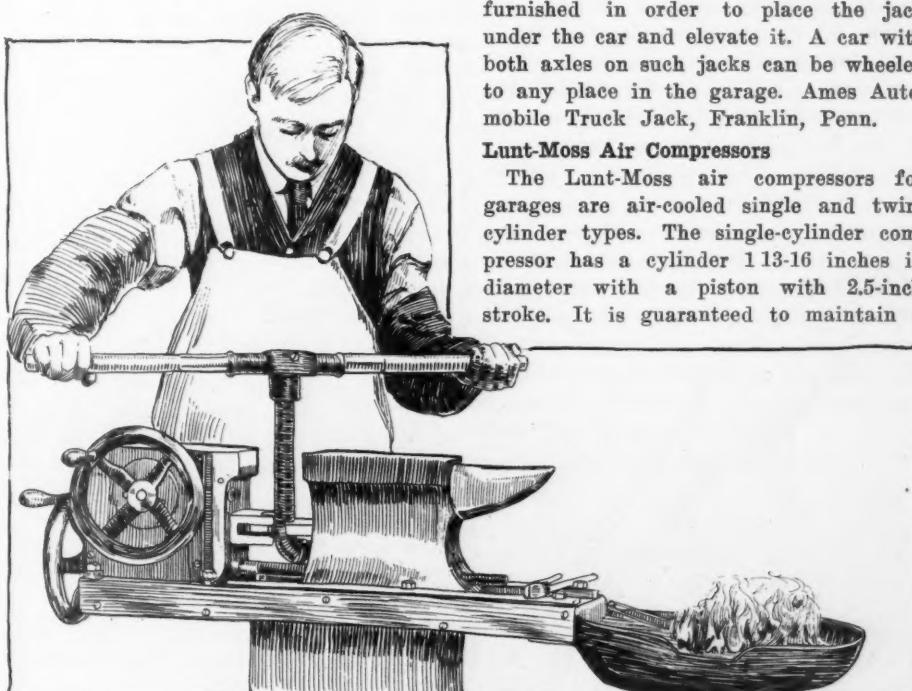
DETROIT TOOL CO.'S PORTABLE BLACKSMITH SHOP
